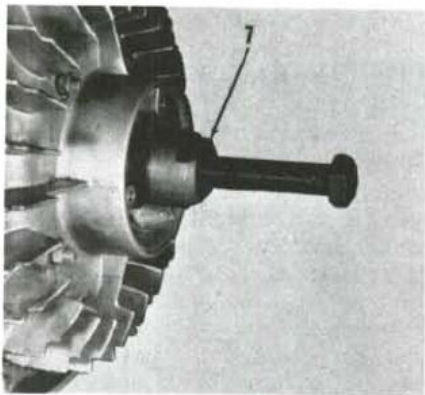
The special puller (7) is a practical necessity for flywheel removal.
